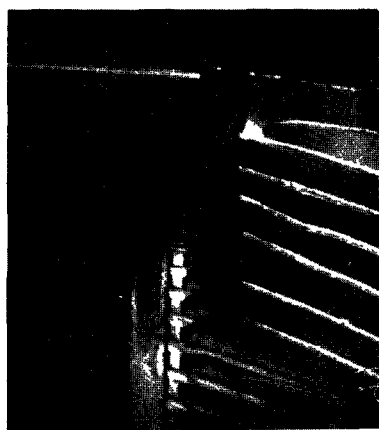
A stream of bubbles from a leak in the damaged end weld of a fuel element
